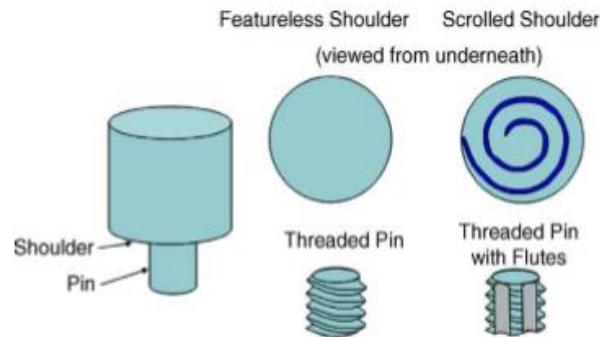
Schematic drawing of the FSW tool profiles [6]
